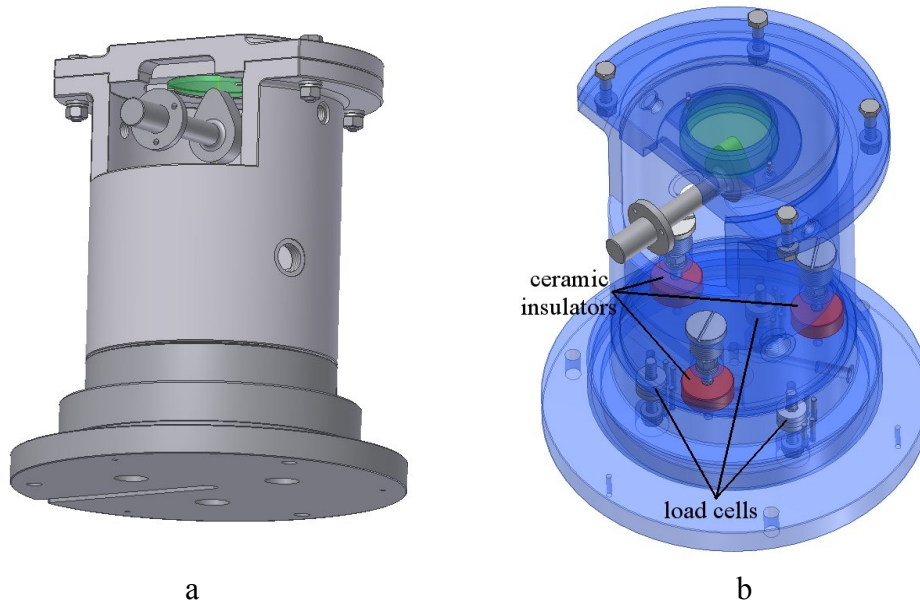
Measurement unit (a) and details of some its internal parts (b).
